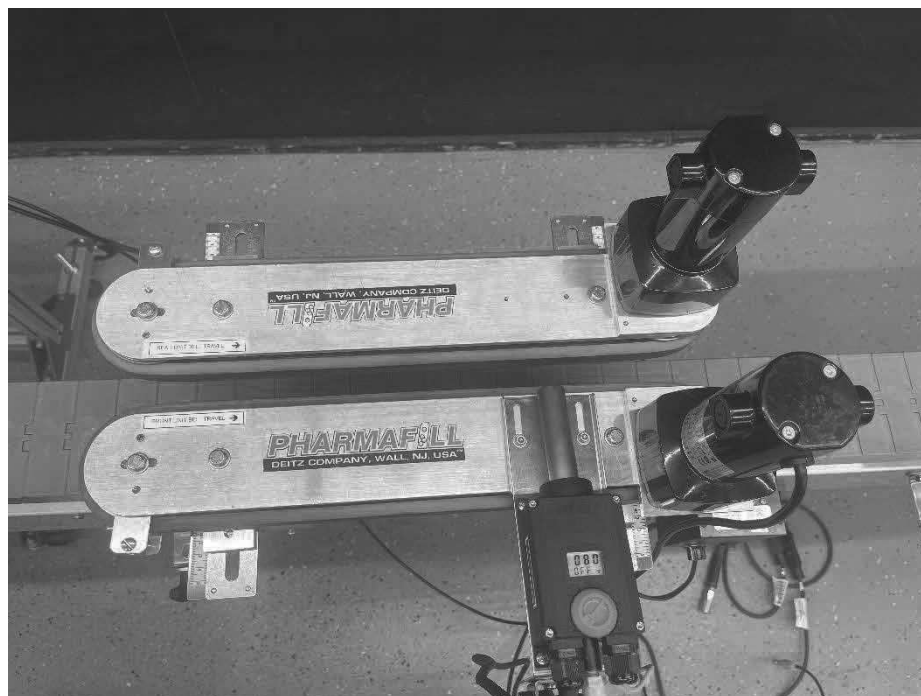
Overhead view over BCV2 unit centered to standard Deitz conveyor.
